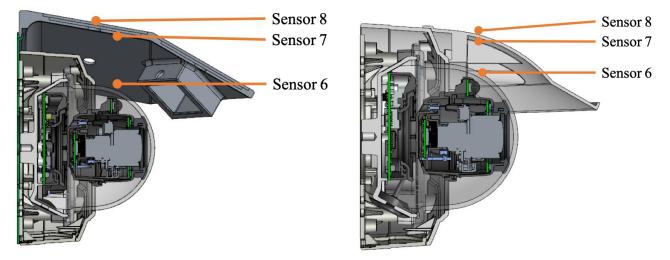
Sensor 6-8 show in side section view of the prototype.
